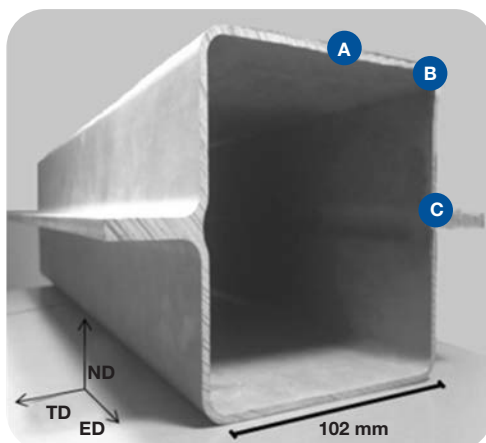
Investigated extrusion welding locations of the AM30 profile.
